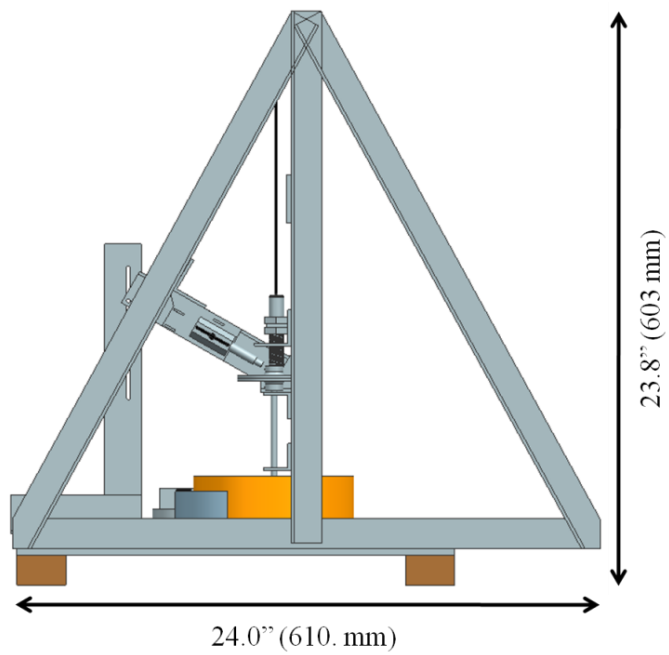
Side View of Dynamometer Assembly, Scale 1:8
